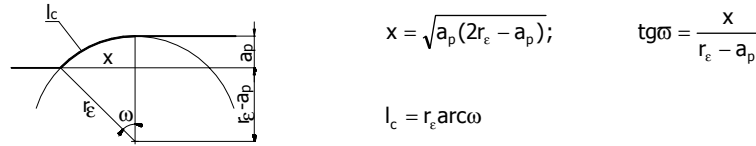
Determination of contact length (l_c) between cutting tool and workpiece
